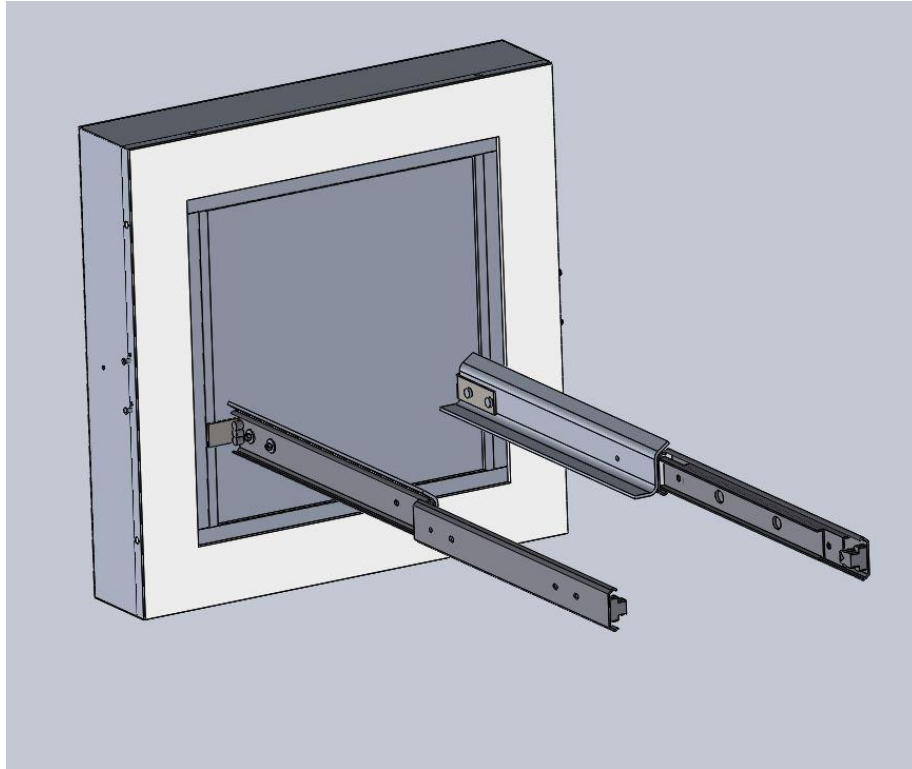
Assembly of drawer face with drawer slides, grease protectors and L brackets attached.
